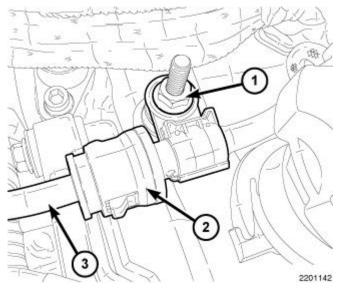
Fuel Injector Return Line Courtesy of CHRYSLER LLC
